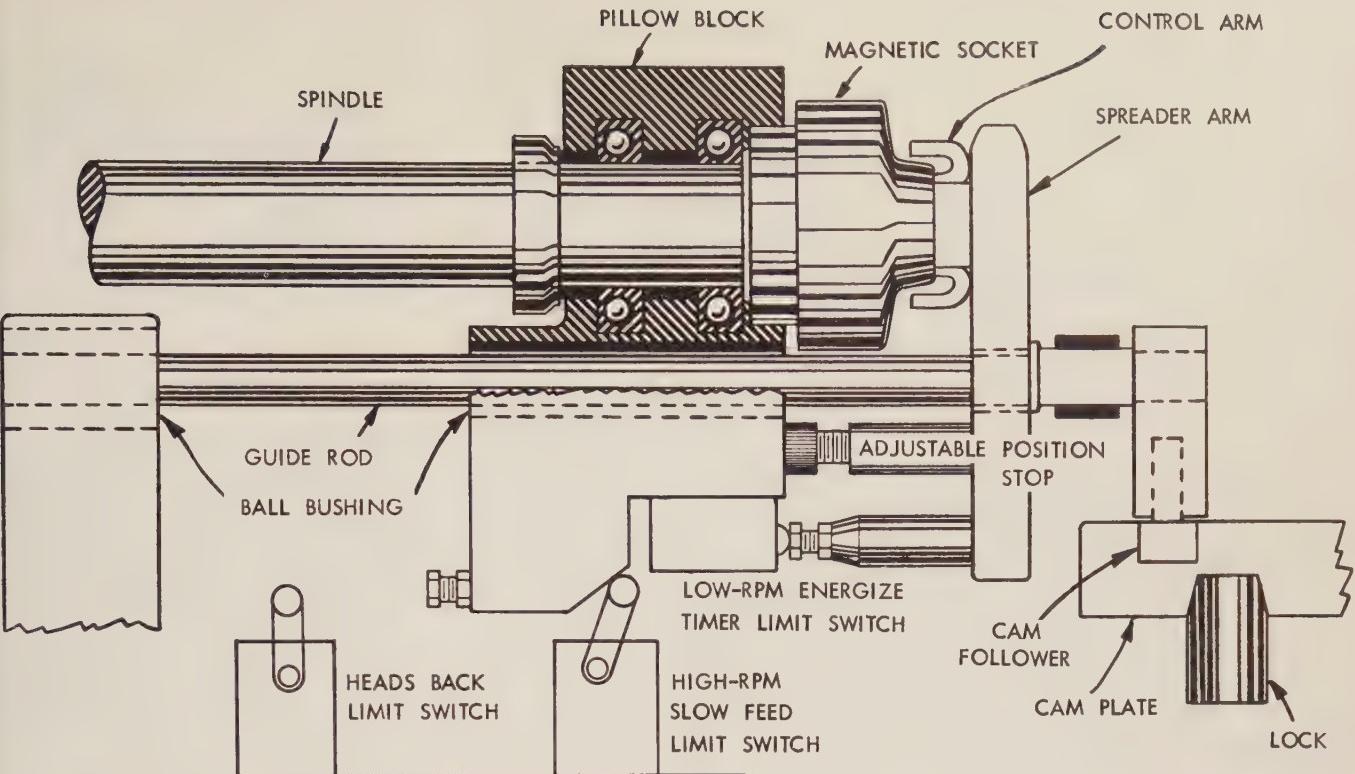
During assembly of the bushing into the lower control arm, it is necessary to control the driving torque as the bushing is seated against the control arm. This is done by the use of a limit switch which is tripped one revolution before the bushing is to be seated against the control arm. The limit switch stops the high-speed forward travel of the driving spindle and reduces the excitation of an eddy-current brake and clutch (not shown) to the value required to provide a low torque for seating the bushing. The spindle drives the bushing through the remaining revolution until it is seated against the shoulder of the control arm.
